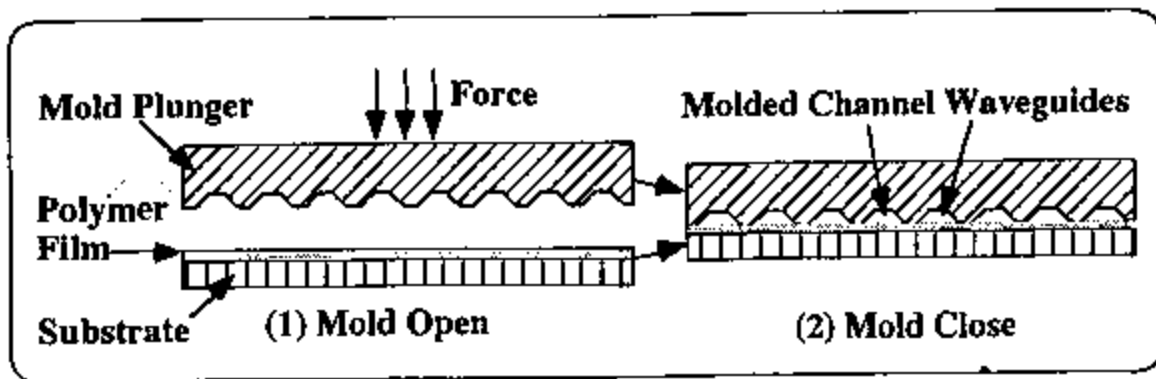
Schematic of the two-piece of compression molding technique to form 3D tapered waveguide.
